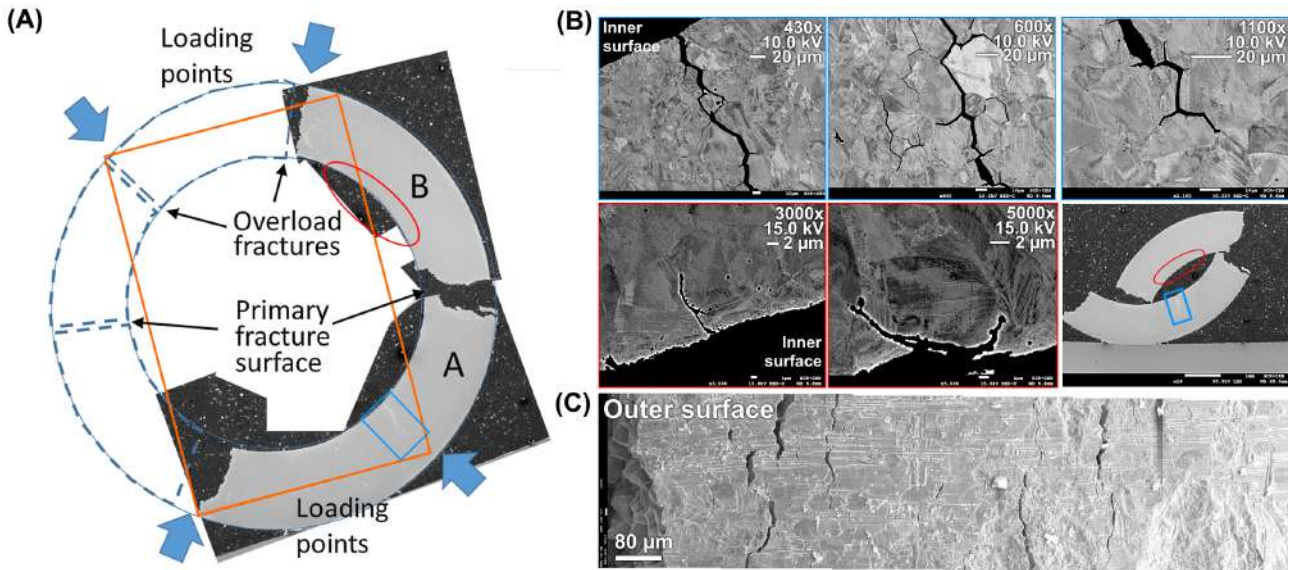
(A) Reconstruction of the failure of TTO-1-053 (390 MPa). (B) BSE-SEM imaging of the crack initiation along the inner surface. (C) SE-SEM of the as-received O-ring's outer surface.
